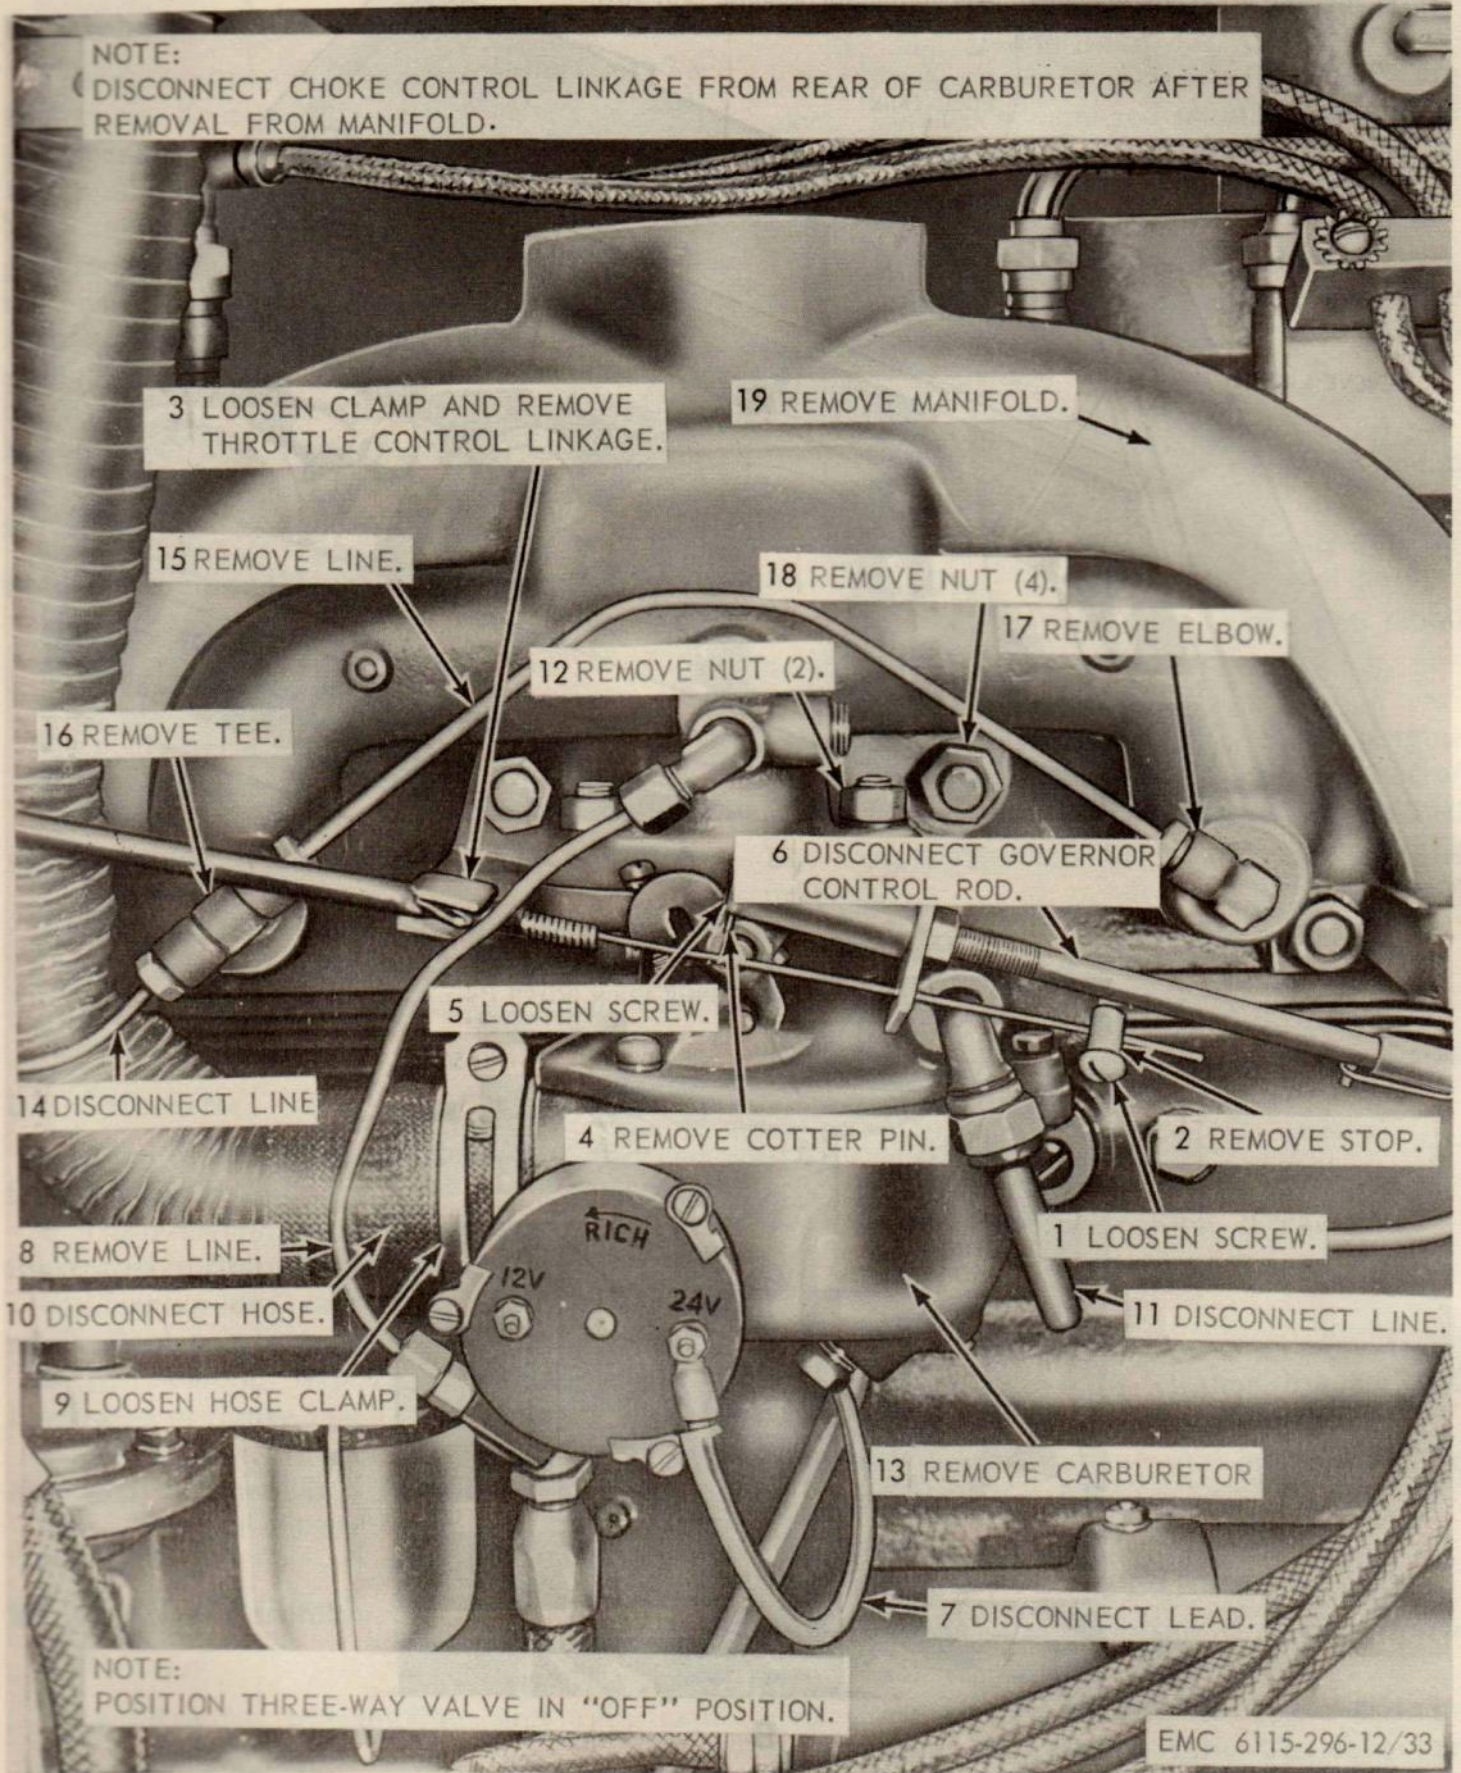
Carburetor and manifold, removal and installation, and carburetor choke adjustment.
